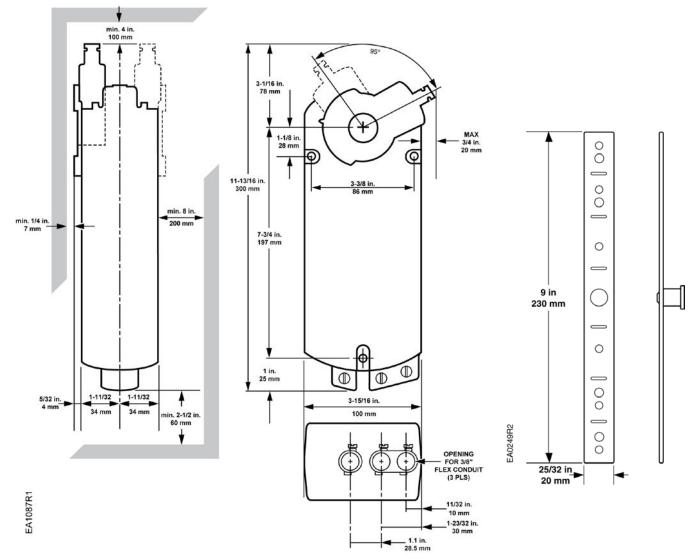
Dimensions of the GCA Actuator and Mounting Bracket in Inches (Millimeters).
